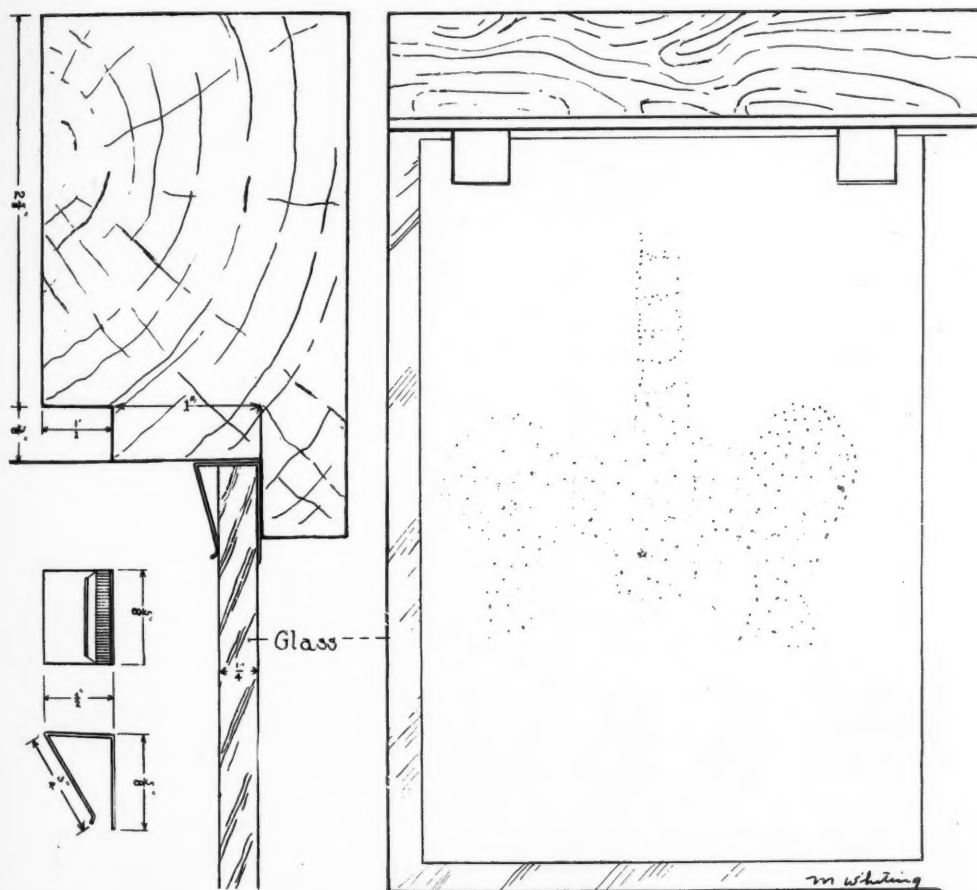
A cross-section of the top of a view-box with the clip in position; a front view with an X-ray film held in place by two clips, and a working drawing.
